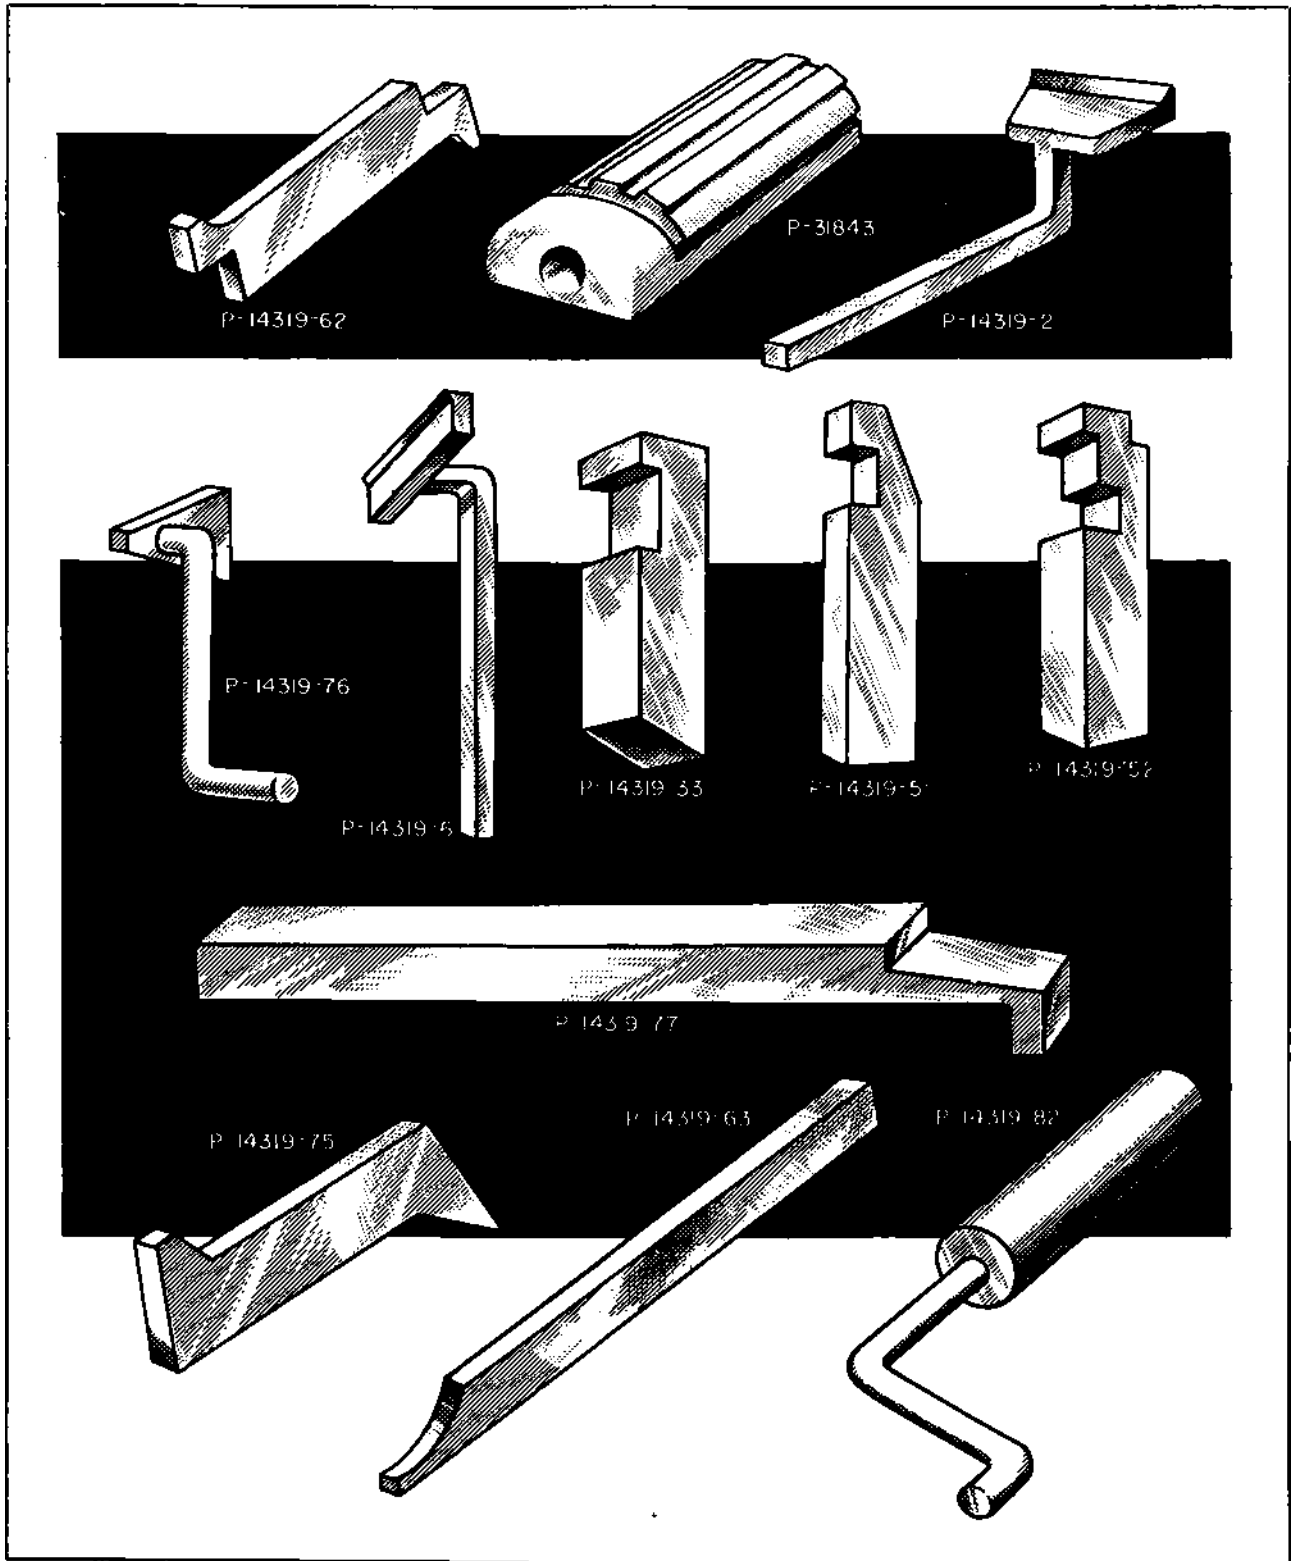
(SHEET 1 of 4 SHEETS)—SPECIAL TOOLS—BUCKING BARS
